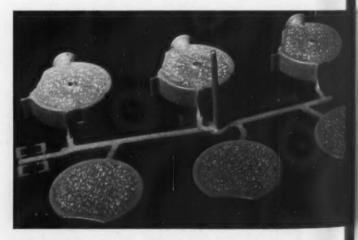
Projector parts, produced in multiple-cavity molds, have advantages of higher production methods by combining parts in one mold
